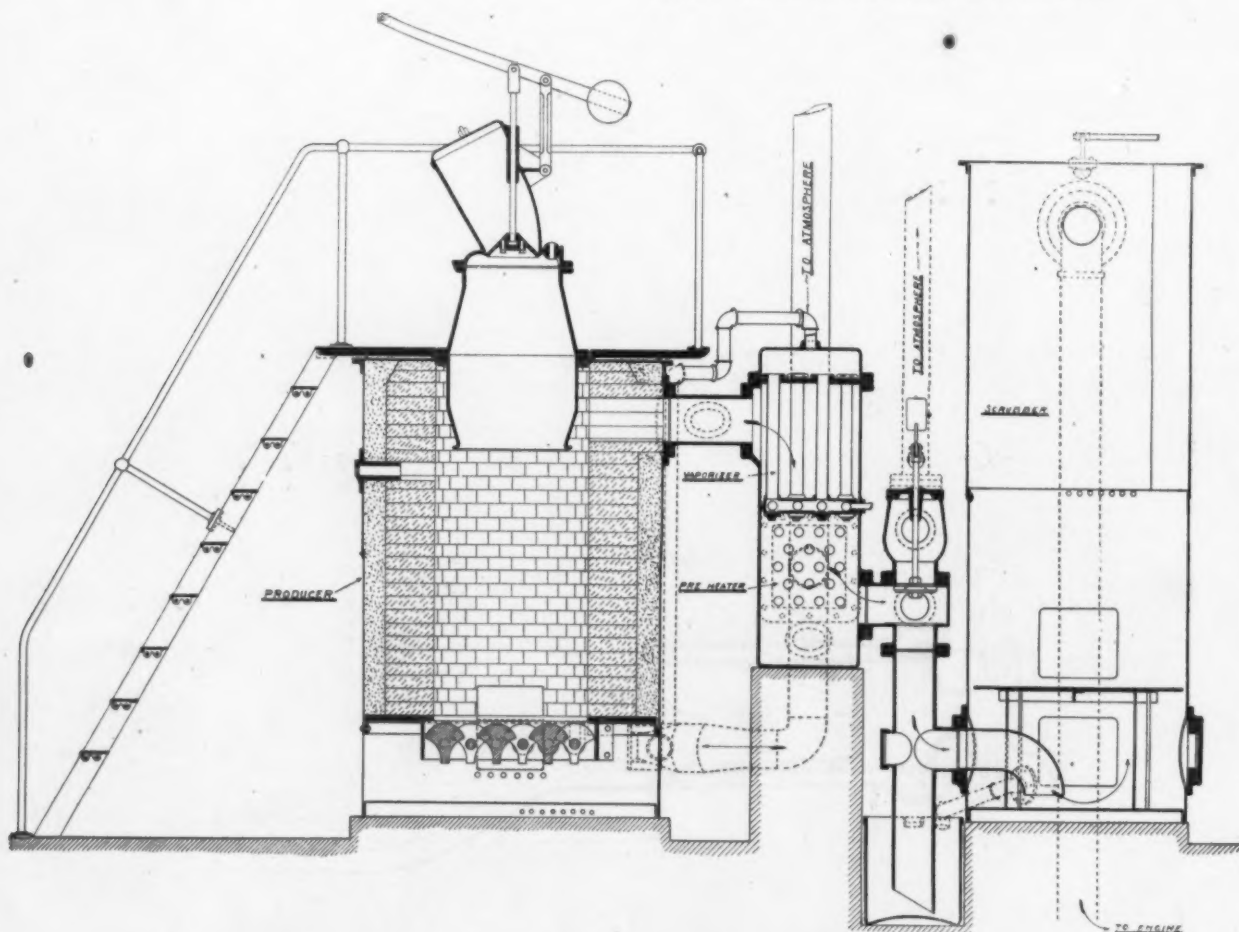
Cross Section of the Munzel Gas Producer, Vaporizer and Scrubber.
